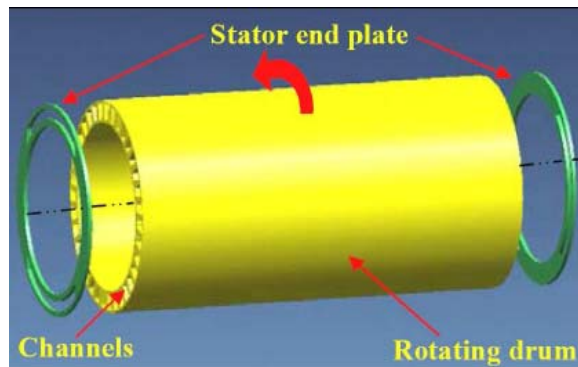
A wave rotor drum consisting of cylindrically arranged tubes⁴⁸.
